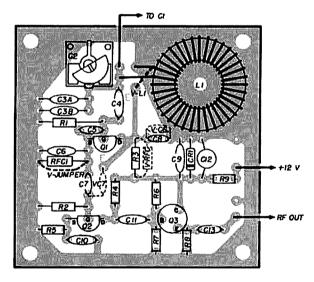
Parts placement as viewed from the foil side of the printed-circuit board. Seiler layout can be seen by ignoring the dashed lines and components designated by "V".
